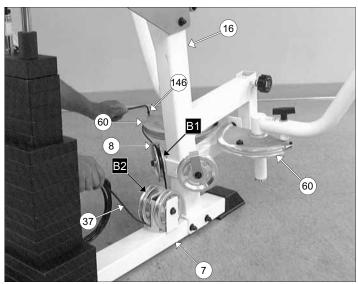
Attach one end of the Pec Dec Cable (#37) to the Aluminum Cam Plate (#60) and secure it onto place using one Socket Head Cap Screw 1/4-20 X 3/4 (#146). Next, route the Pec Dec Cable (#37) over the Pulley 4 1/2 Rd. (#67-Labeled B1), and then under the Pulley 4 1/2 Rd. (#67-Labeled B2).
